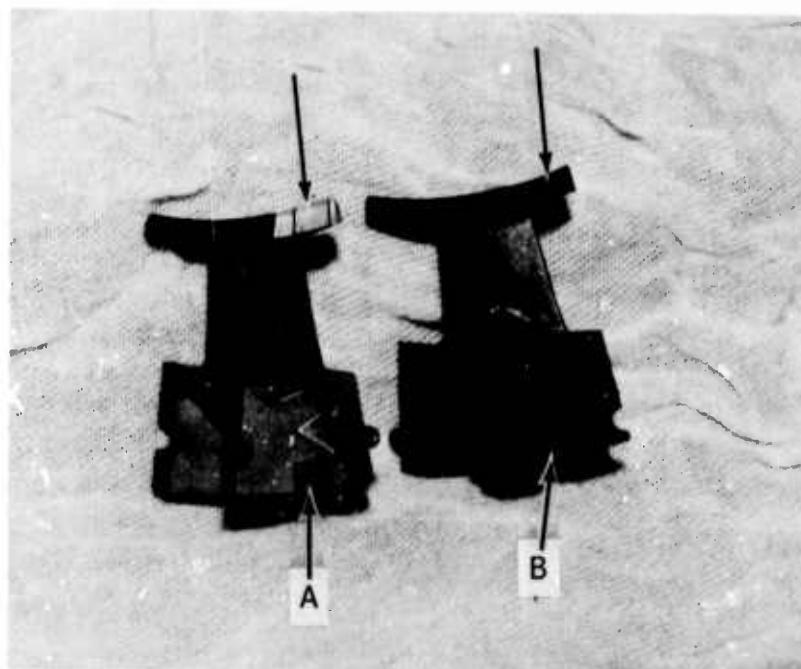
First Stage Stator Segments Showing Locating Tabs on Revised Design. A - Revised Design, B - Old Design
